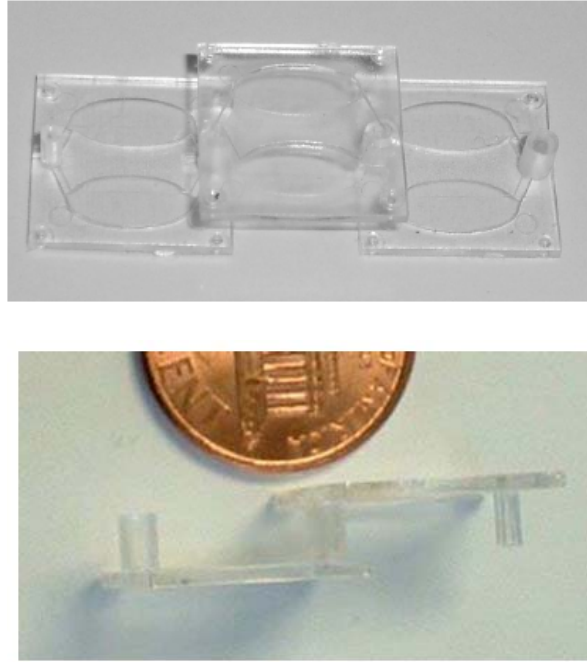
Pictures of Type I package interlocked at inlet and outlet
